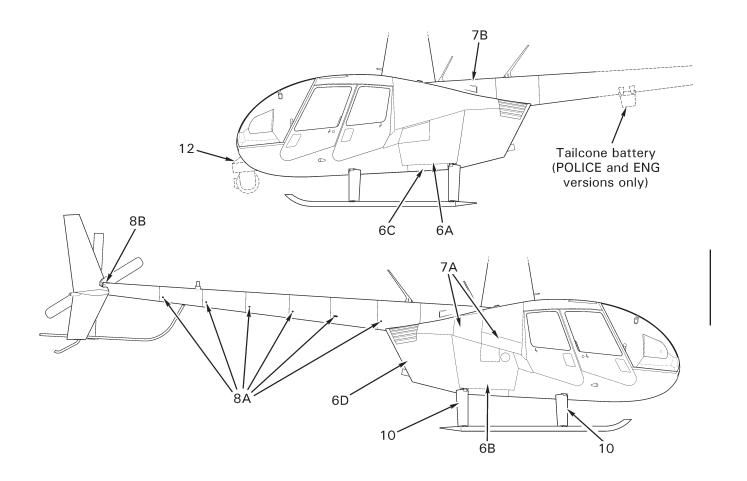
A ACCESS AND INSPECTION PANELS
